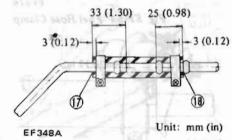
Fuel Pipe to Fuel Return Pipe Rubber Hose
